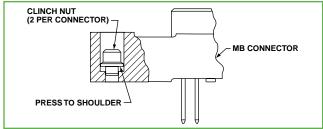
MB CONNECTOR WITH CLINCH NUT MOUNTING
